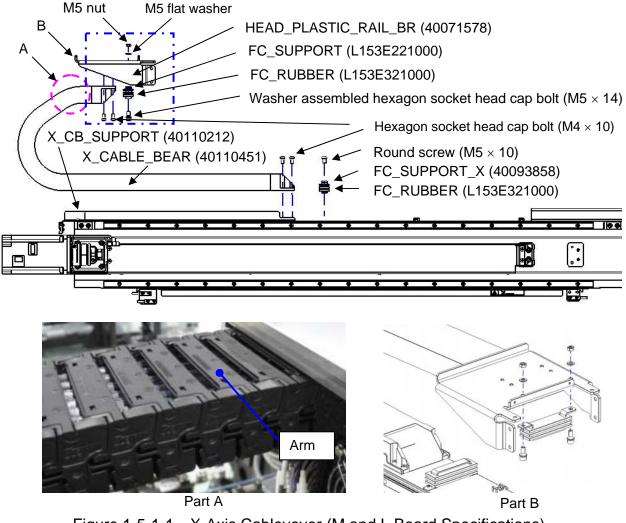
X-Axis Cableveyor (M and L Board Specifications)
